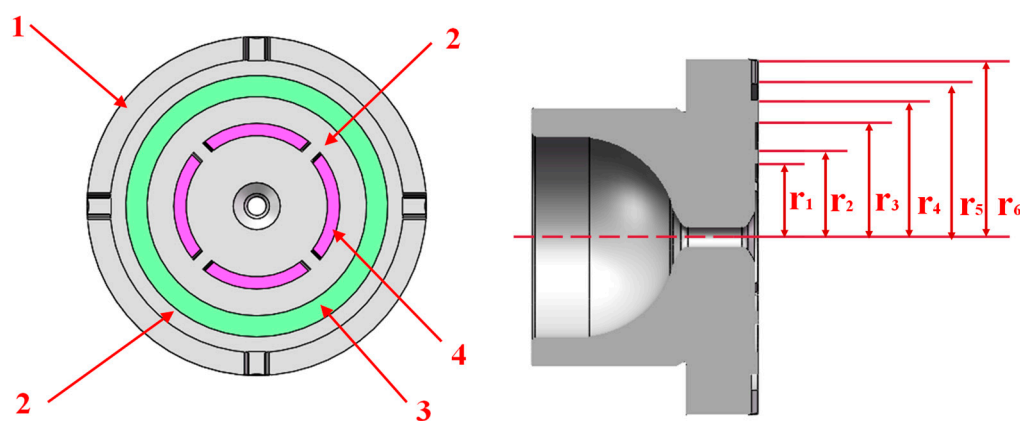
Diagram of the slipper bottom surface structure. 1—outside support ring; 2—annular oil groove; 3—Sealing ring; 4—inner support ring.
